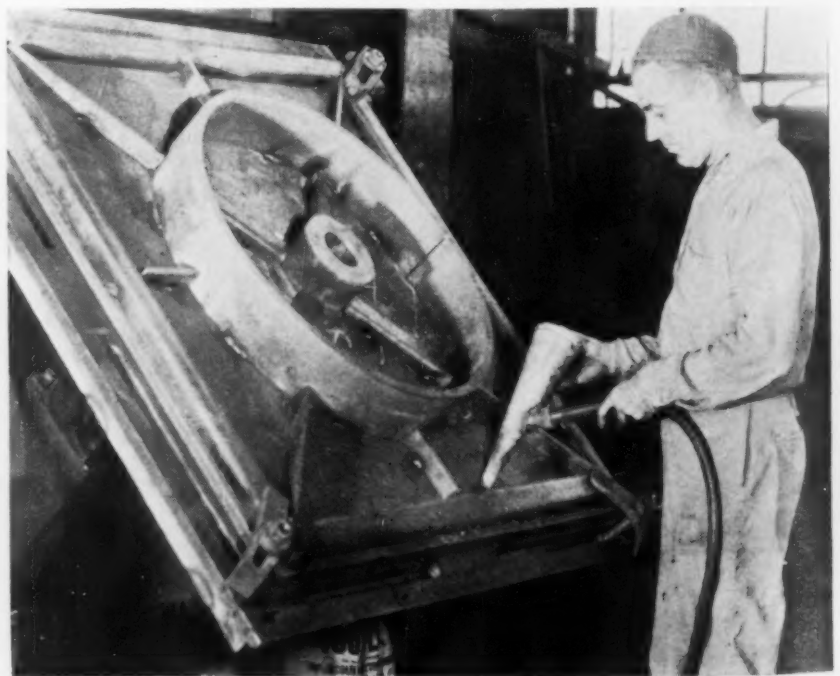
Fabricating 51 1/4 in. diam gear blank with semi-automatic welder.
